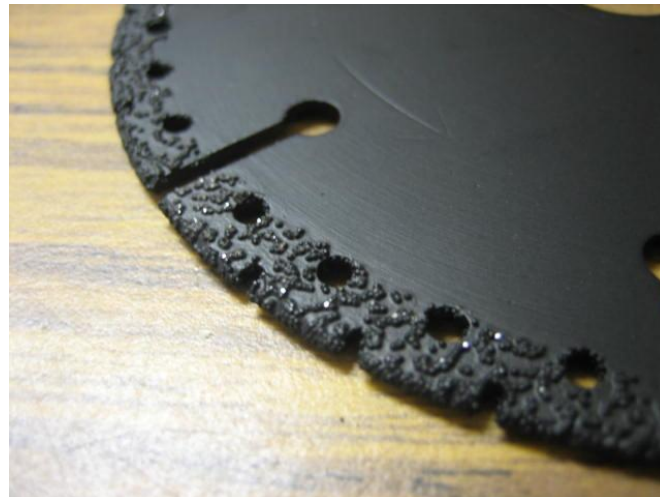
Close-up of a vacuum brazed diamond blade¹³⁰
